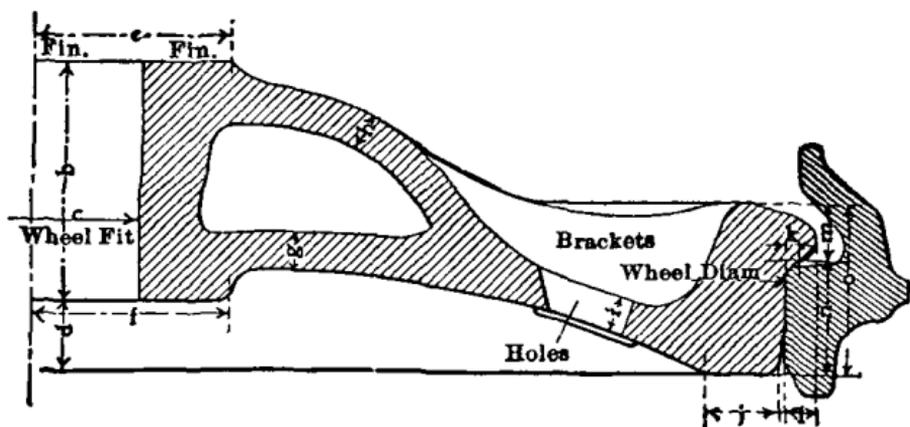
Griffin Wheel Co. F.C.S. cast-iron wheel. See p. 400 for dimensions.
